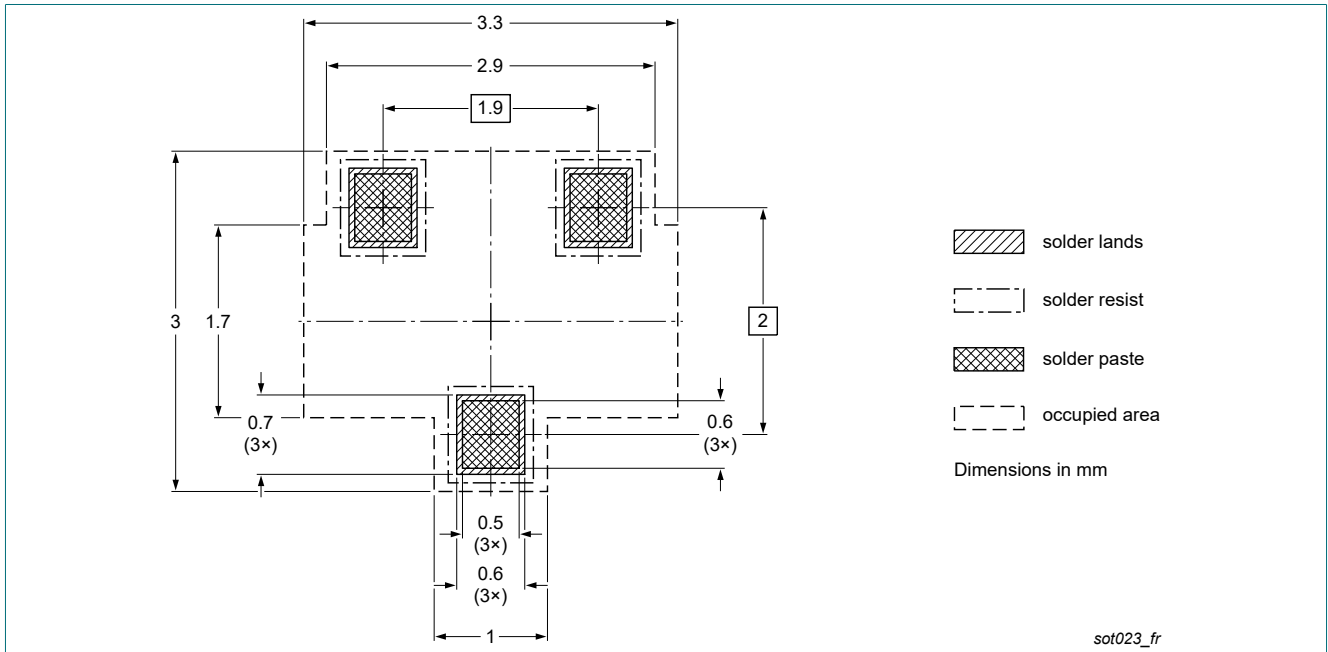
Reflow soldering footprint for TO-236AB (SOT23)
